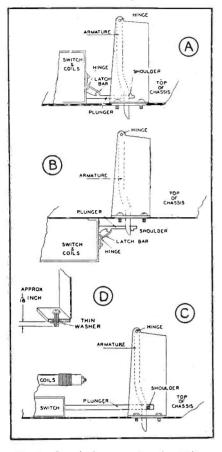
Details for mounting the Airline remote control magnet assembly.
